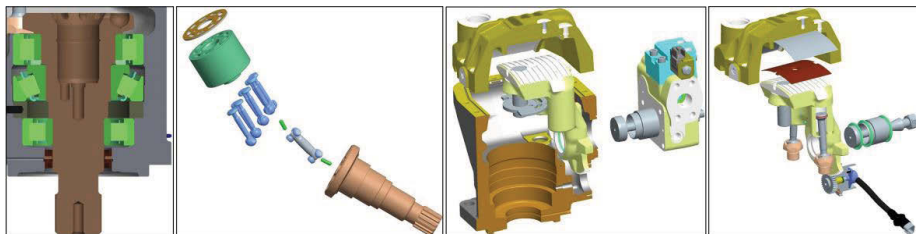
Four basic pump/motor functions: shaft bearings, rotating pressure-loaded parts, pressure-loaded body parts and displacement control parts (left to right)
